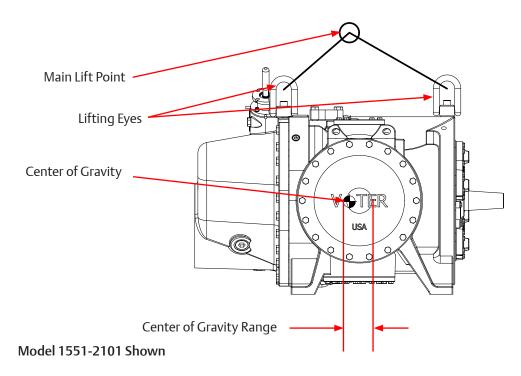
Bare Shaft Compressor Assembly Center of Gravity (Models 291-2101)
